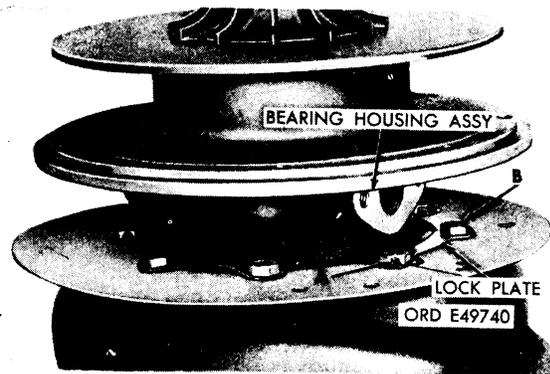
PREPARING TO REMOVE BEARING HOUSING ASSEMBLY AND RELATED PARTS - TURBOCHARGERS 7748900 AND 10935279.
